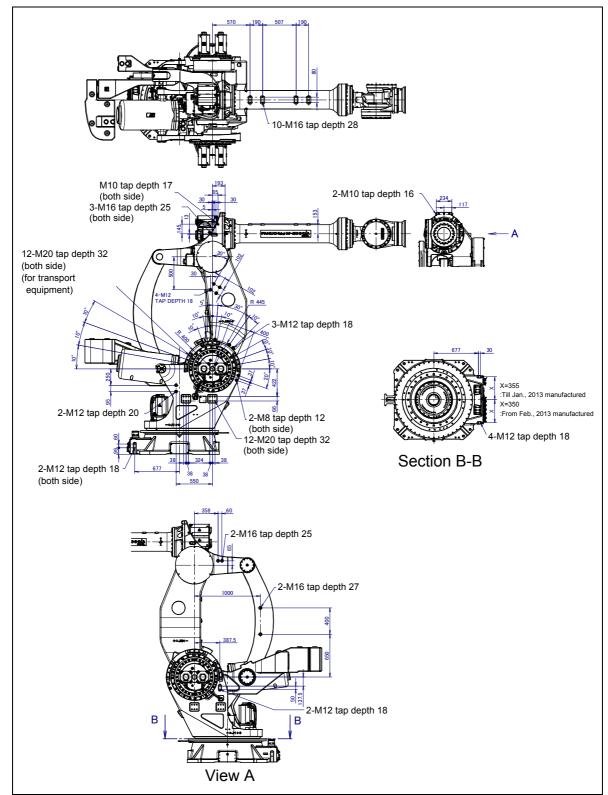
(b) Equipment mounting faces (M-2000iA/900L)
